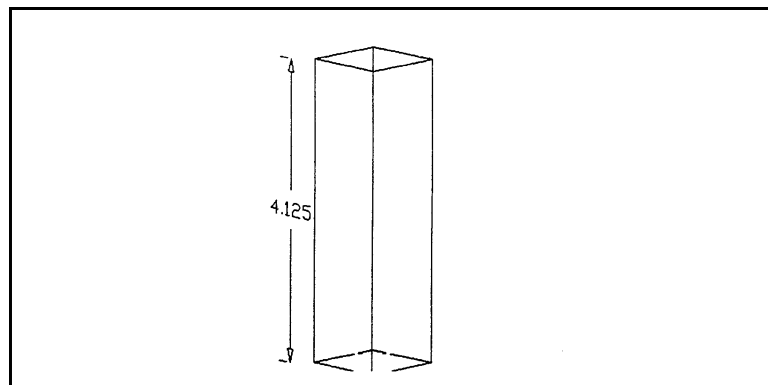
Z-TICAL DIMENSION AFTER RECTIFICATION
